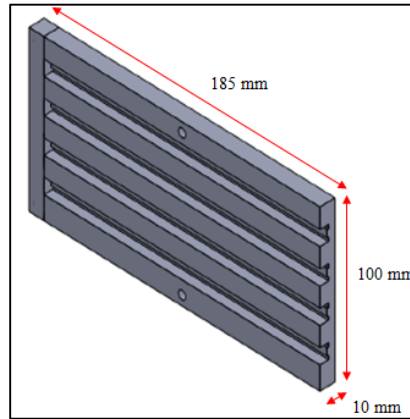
A 3D drawing of bottom fixture for flange core assembly
